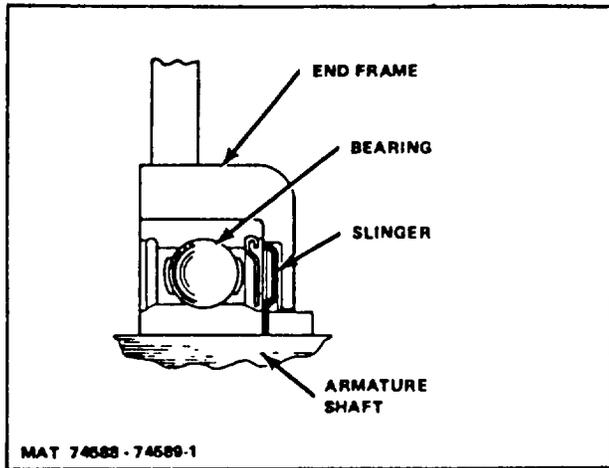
Drive End Bearing Assembly (Some models use flat washer instead of slinger)
